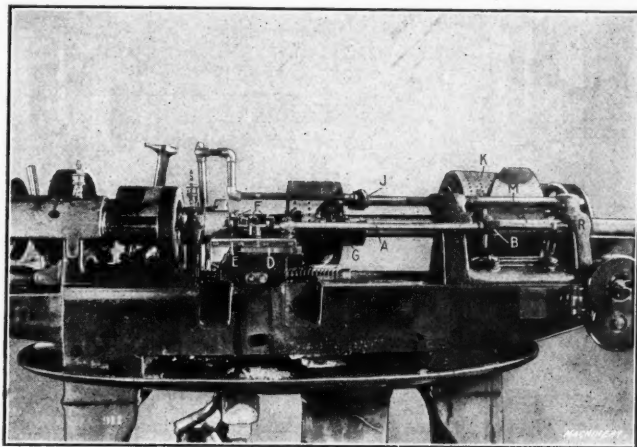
Turning a Multiple Shoulder Shaft on the Cleveland Plain Automatic
